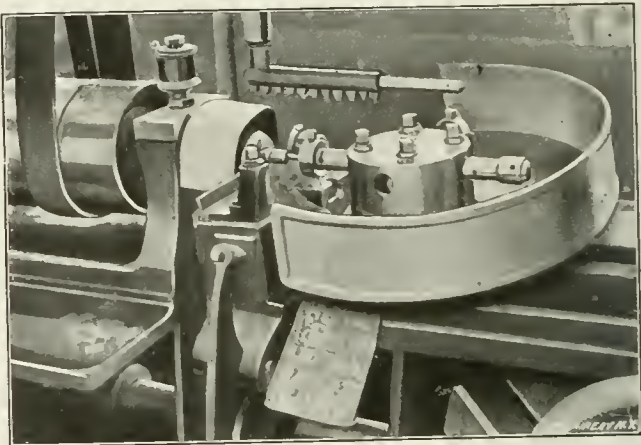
Automatic Machine in which Bearings are drilled and cut off
